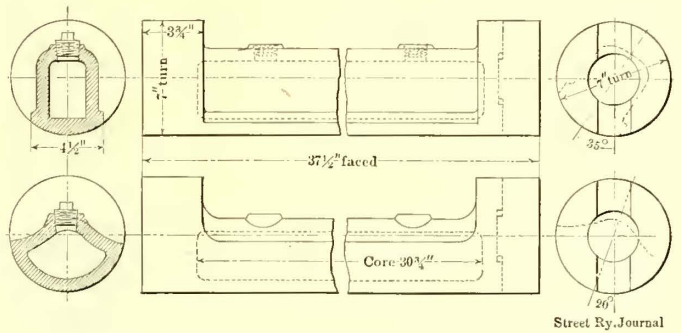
STEAM VALVE FOR 30 IN. CYLINDER
